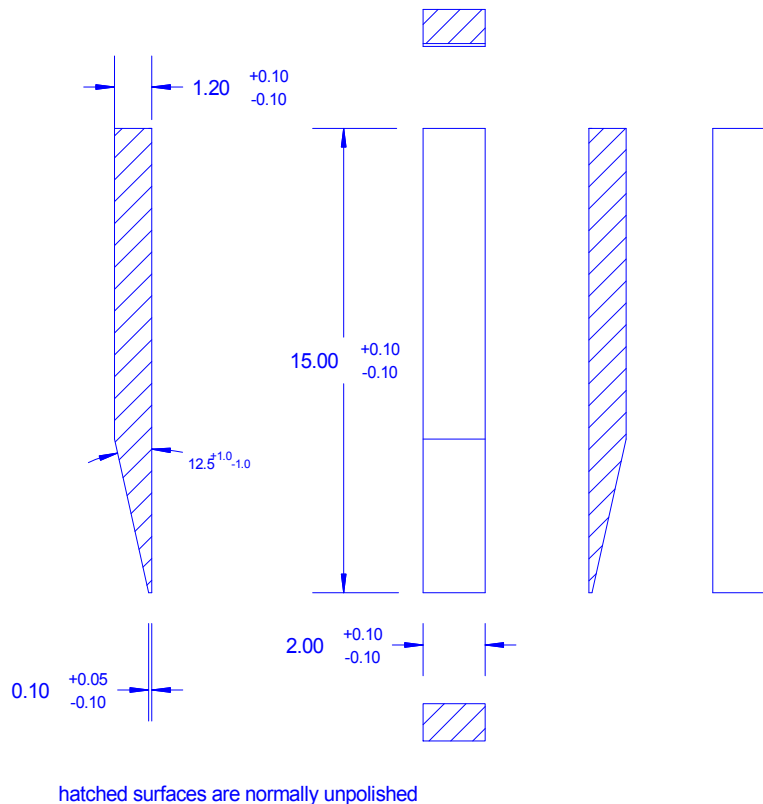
Mechanical drawing of CVD diamond ChDR radiator installed on the BTS [57].
